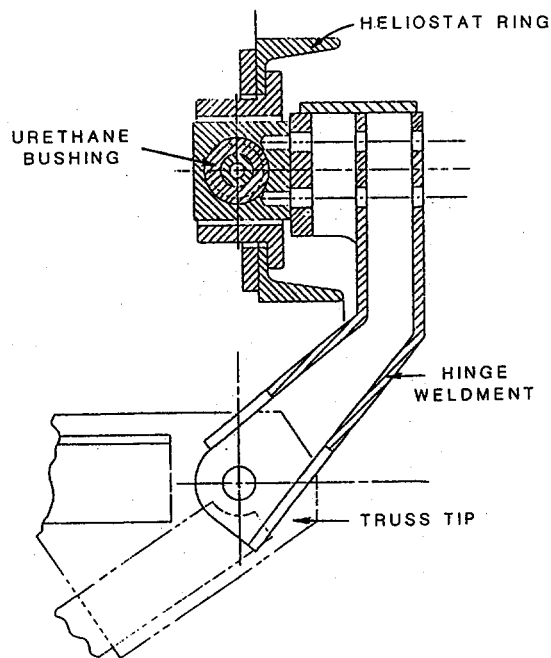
Hinge Connection Detail for Truss Tip to Heliostat Ring.
